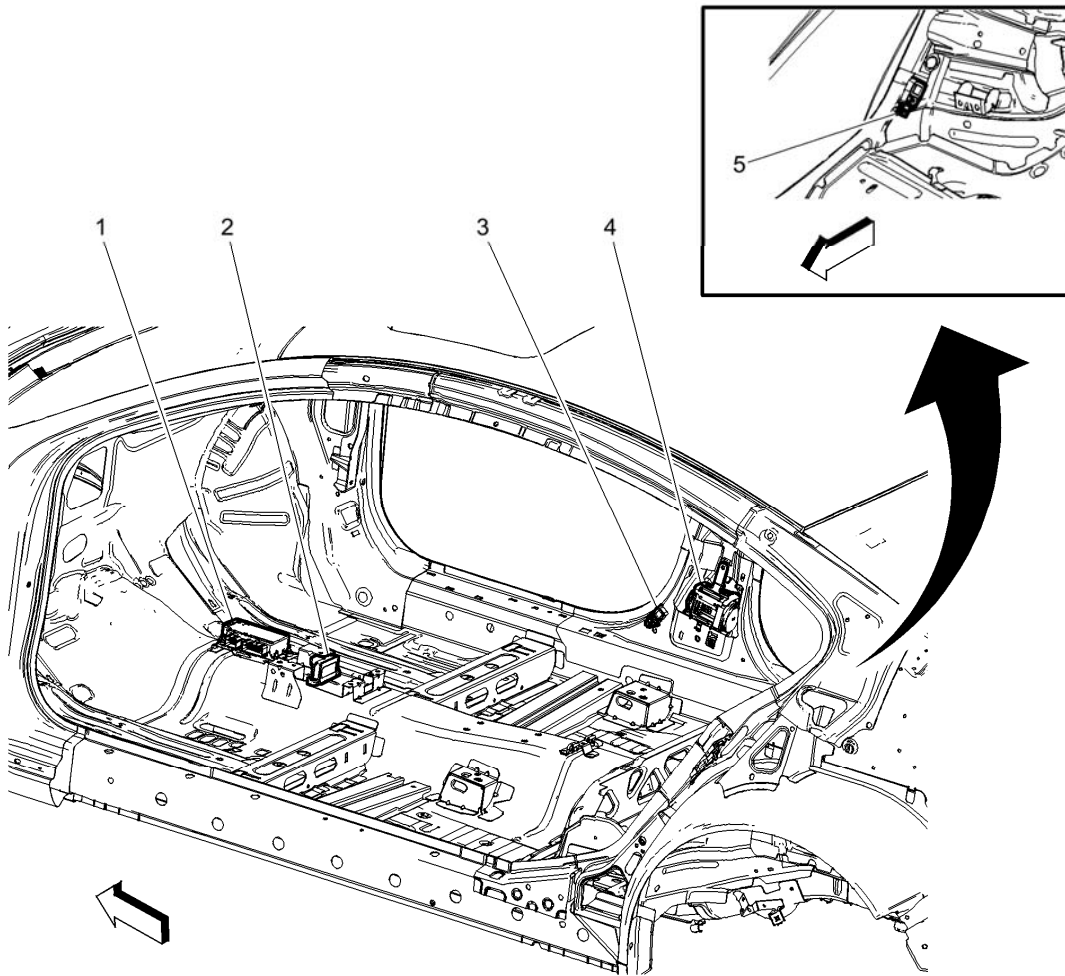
Center and Right Side of Passenger Compartment Component Locations
